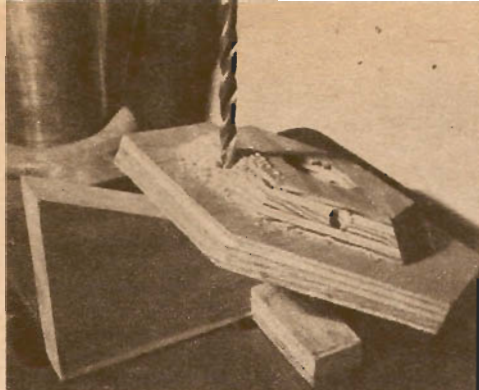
To drill the angled holes for the 2-meter-antenna dowels, use a wedge with a 20° angle. Holes should be drilled to ½-in. depth.
